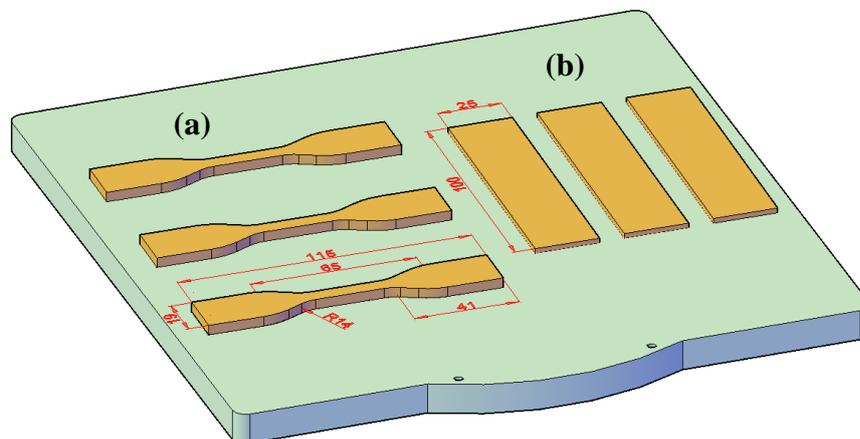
Tensile specimens and bonding plates dimensions (mm)
